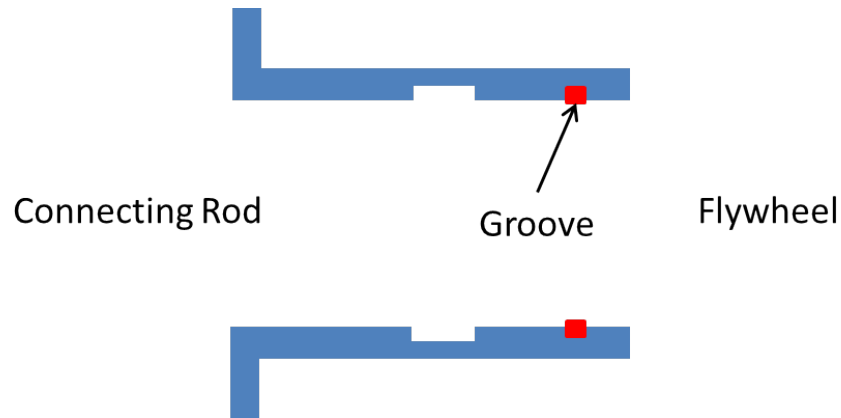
Schematic showing the orientation of the grooved bearing in the compressor
